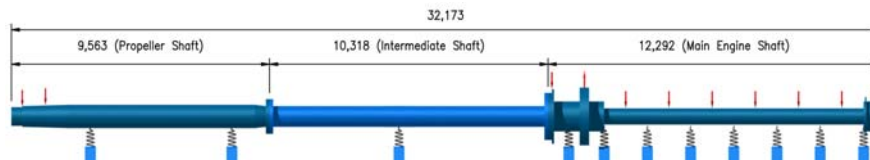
Shafting system of 320,000 DWT crude oil carrier
